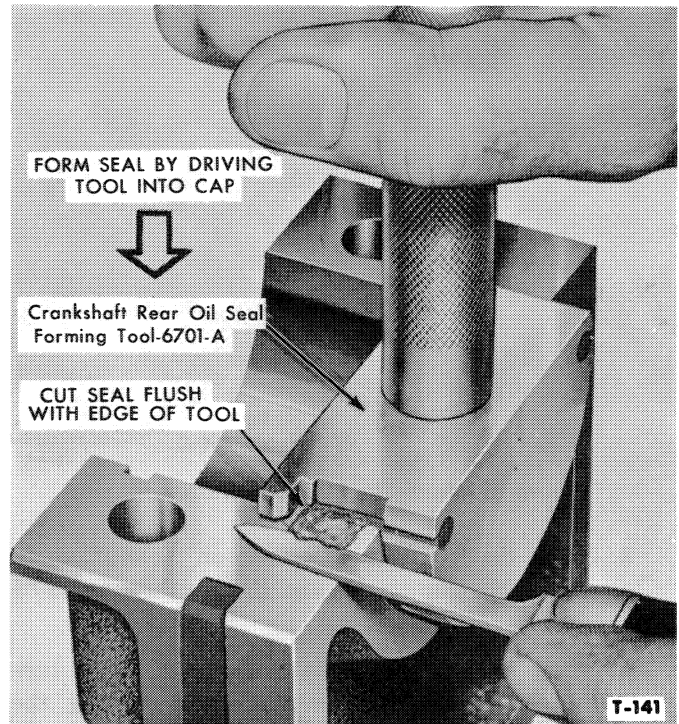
Installing Rear Main Bearing Cap Oil Seal
